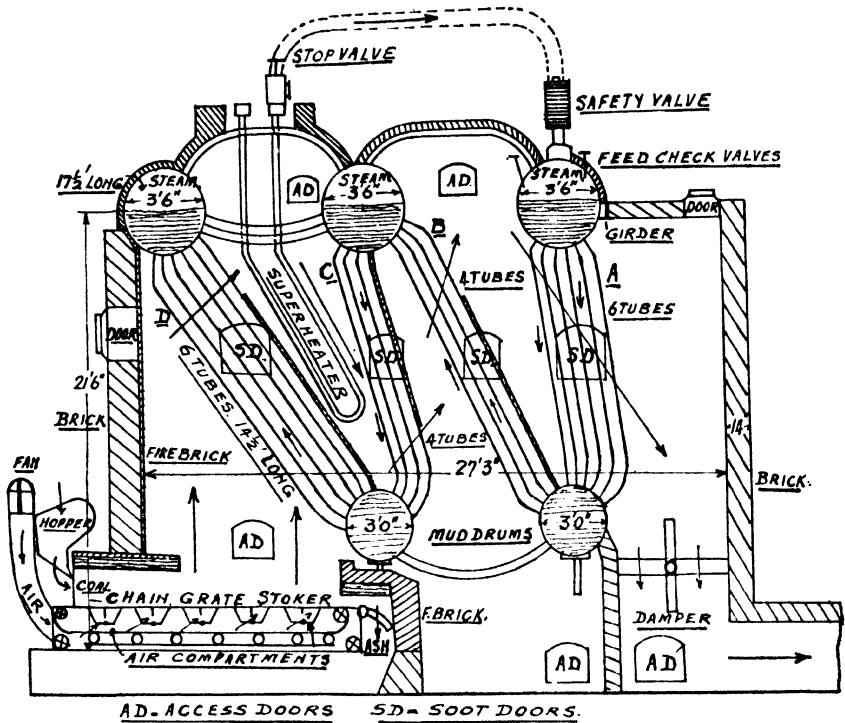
Sectional Side Elevation of Stirling Water-Tube Boiler.
